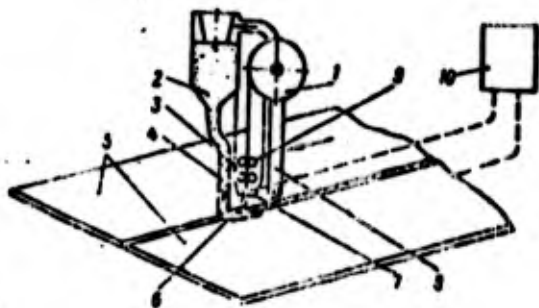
Diagram of welding under a layer of flux: 1 - holder of welding wire; 2 - bin for flux; 3 - feed mechanism; 4 - pipe for flux; 5 - welding parts; 6 - electrode; 7 - orifice; 8 - suction pipe; 9 - feed rollers; 10 - generator.
